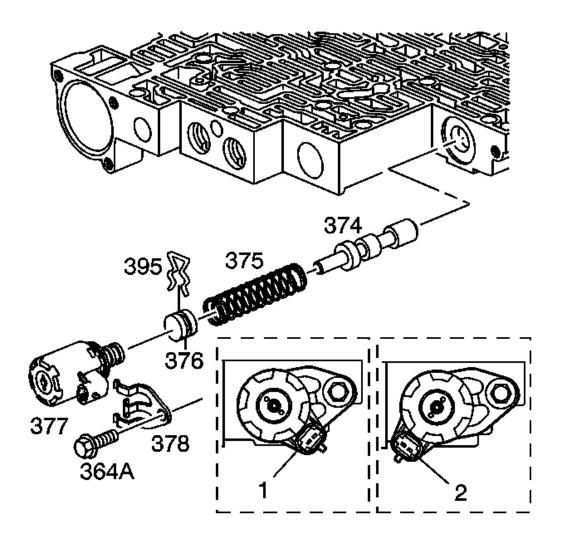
View Of Pressure Control Solenoid & Components Courtesy of GENERAL MOTORS CORP.
